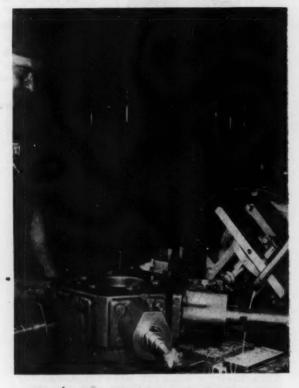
This special indexing fixture is used on a Gisholt turret lathe to finish bosses on each side of a casting. After one boss is machined, the fixture and work are indexed 180° to machine the opposite boss.
